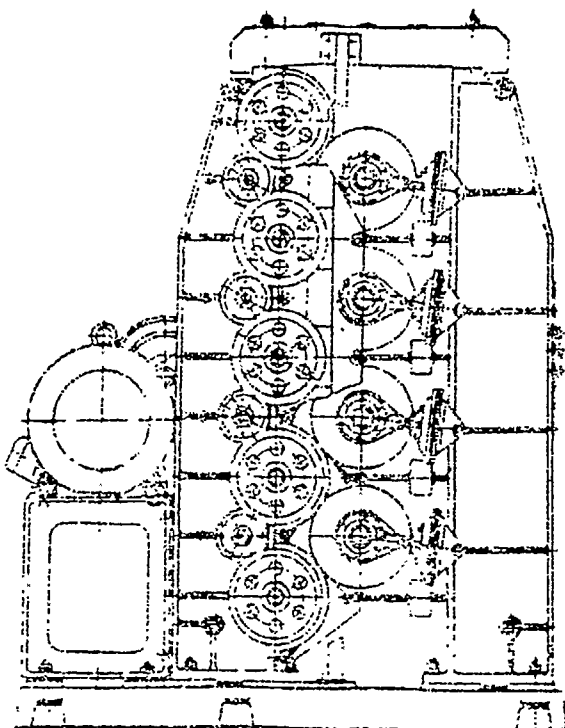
ROLLER MILL FOR MILLING OF ASBESTOS
